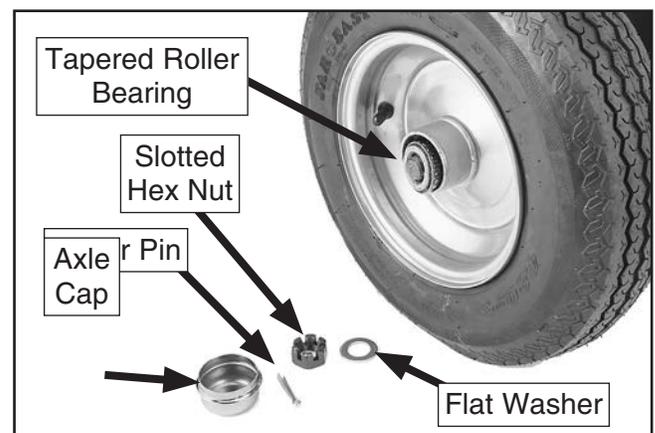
Components removed from wheel to access and grease outer wheel bearing.
